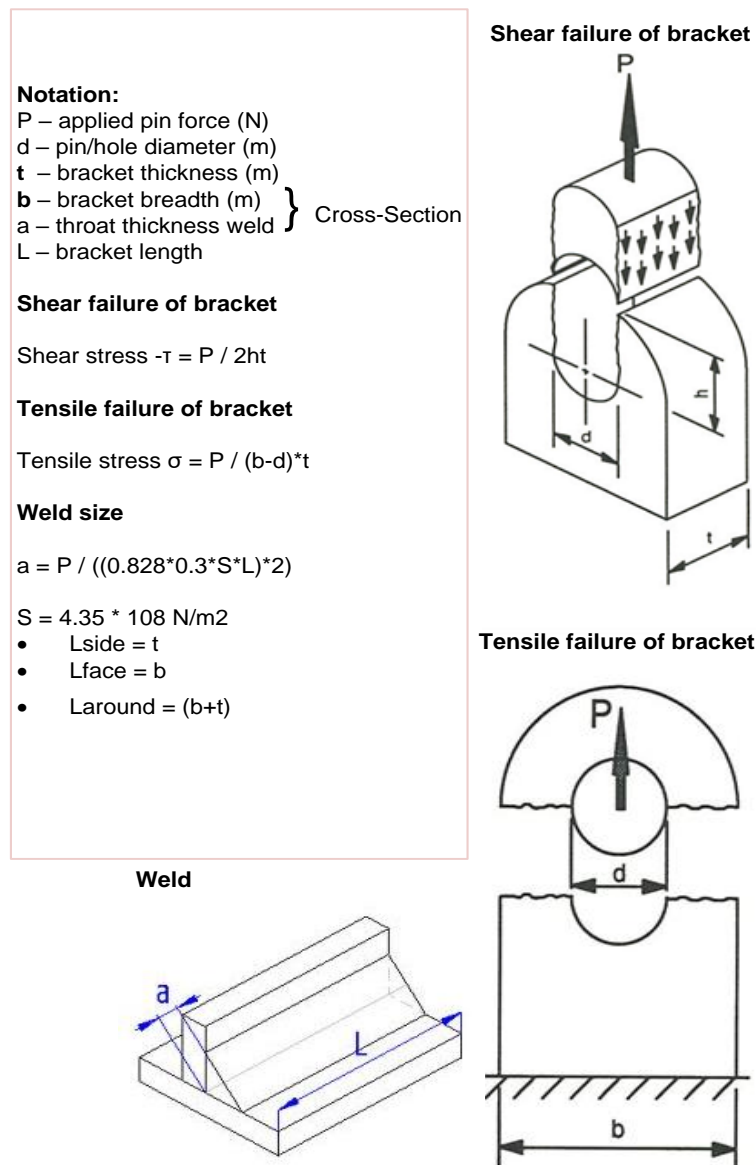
Shear, Tensile failure modes and weld throat graphs and equations [138]
